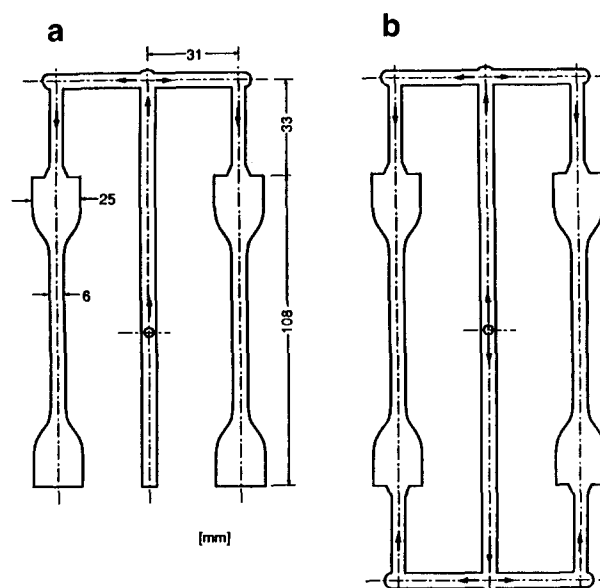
Mould cavity used for the study of weld lines: (a) no weld lines; (b) with weld lines
